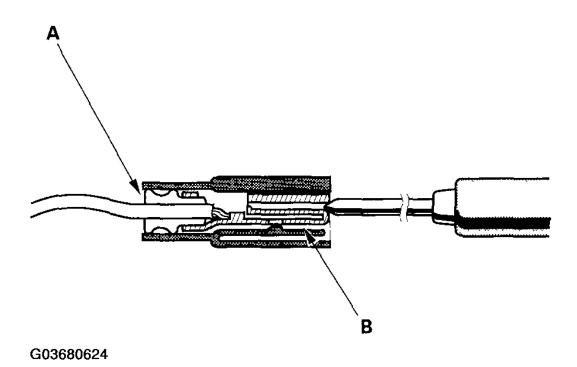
Connecting Backprobe Adapters To Stacking Patch Cords Courtesy of AMERICAN HONDA MOTOR CO., INC.
